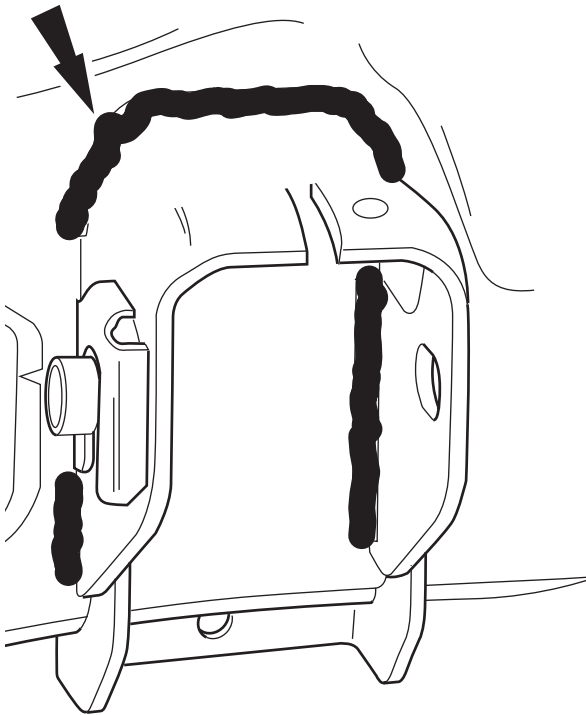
VIEW OF DIFFERENTIAL BRACKET AND REINFORCEMENT ASSEMBLED TO THE FRAME RAIL SHOWING THE WELD PATTERN REQUIRED
